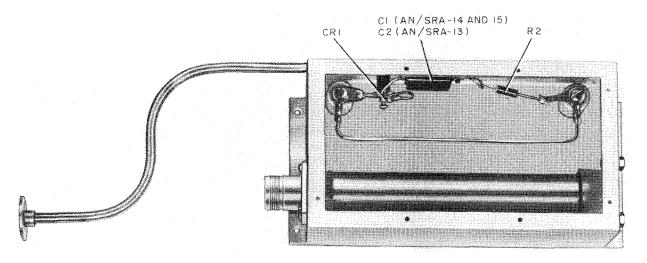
Directional Coupler DC1, Cover Removed, Location of Parts
